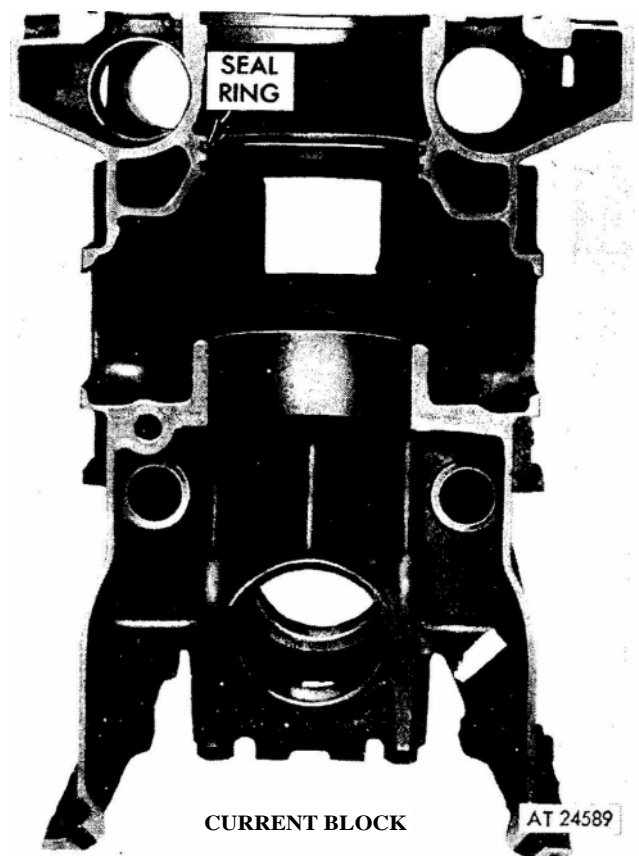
Cylinder liner seal ring locations in in-line cylinder block bores.
